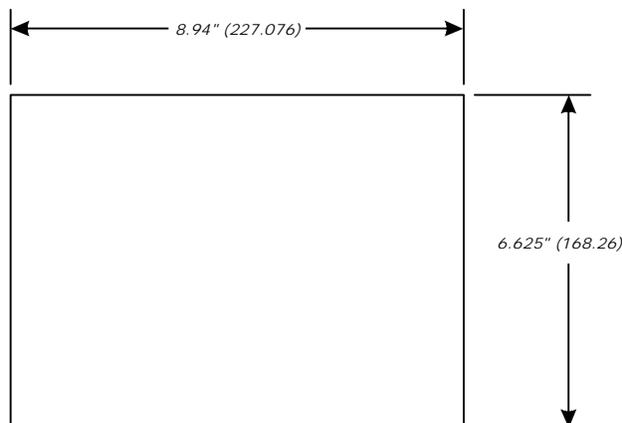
PANEL CUTOUT DIMENSIONS
